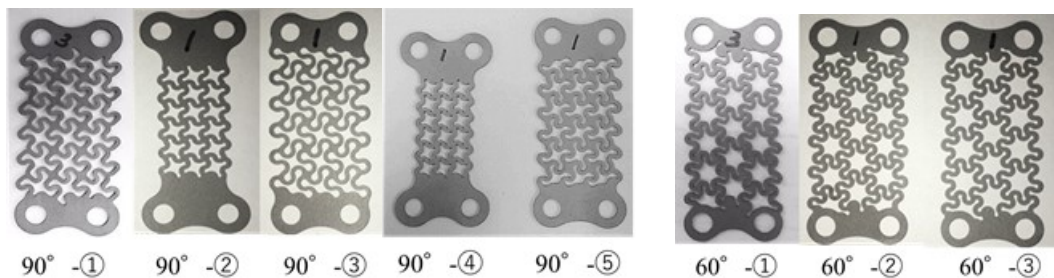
Sample meshed Gum Metal plate specimens for tensile fatigue tests
